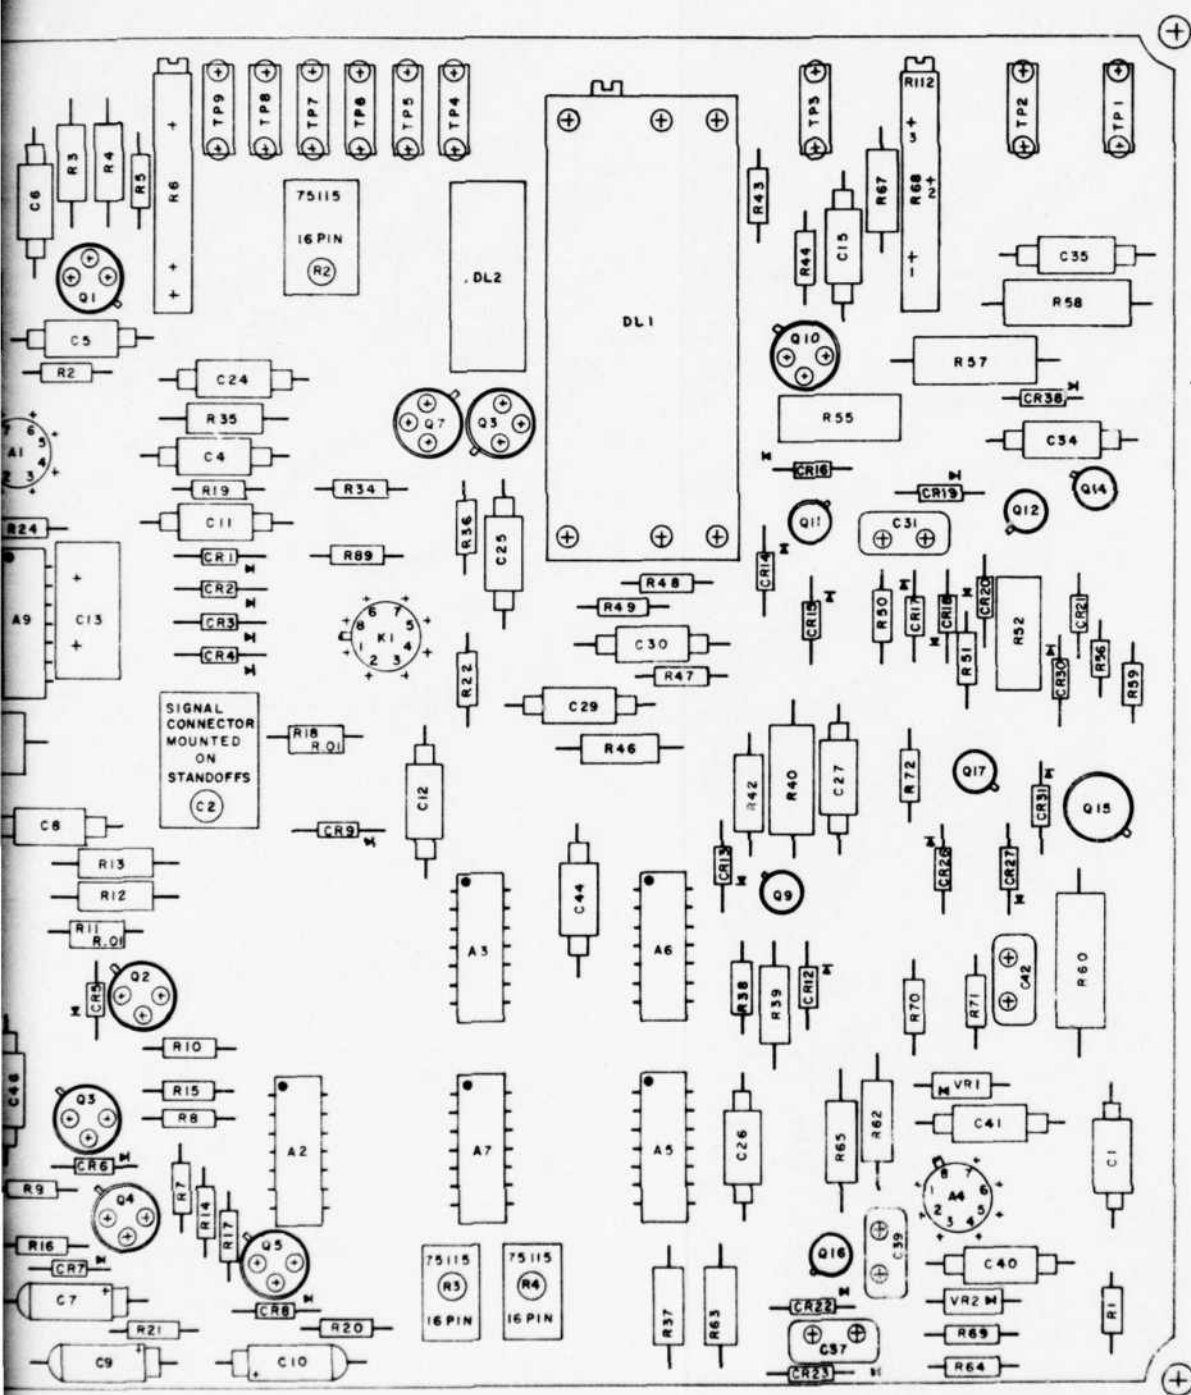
UNMODIFIED A-2 PCB (SHEET 4 OF 4)
